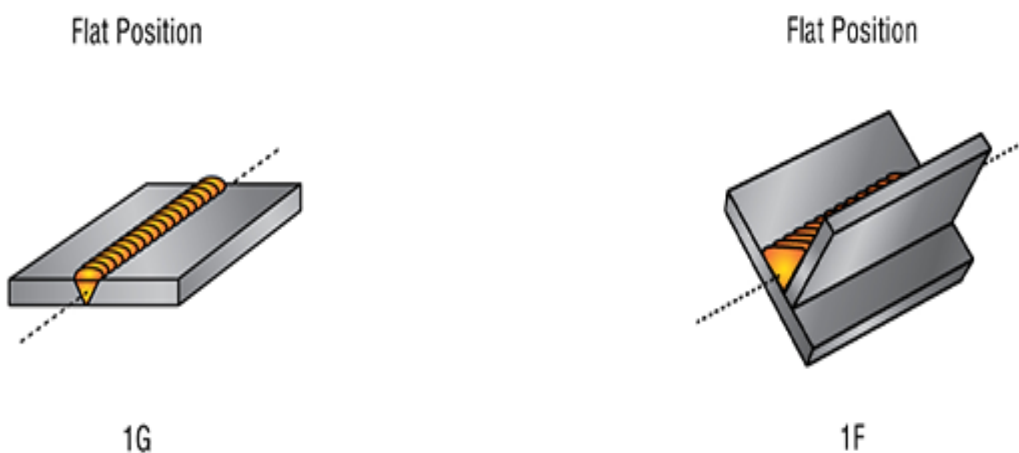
Scheme of placement of components to be welded for flat welding
